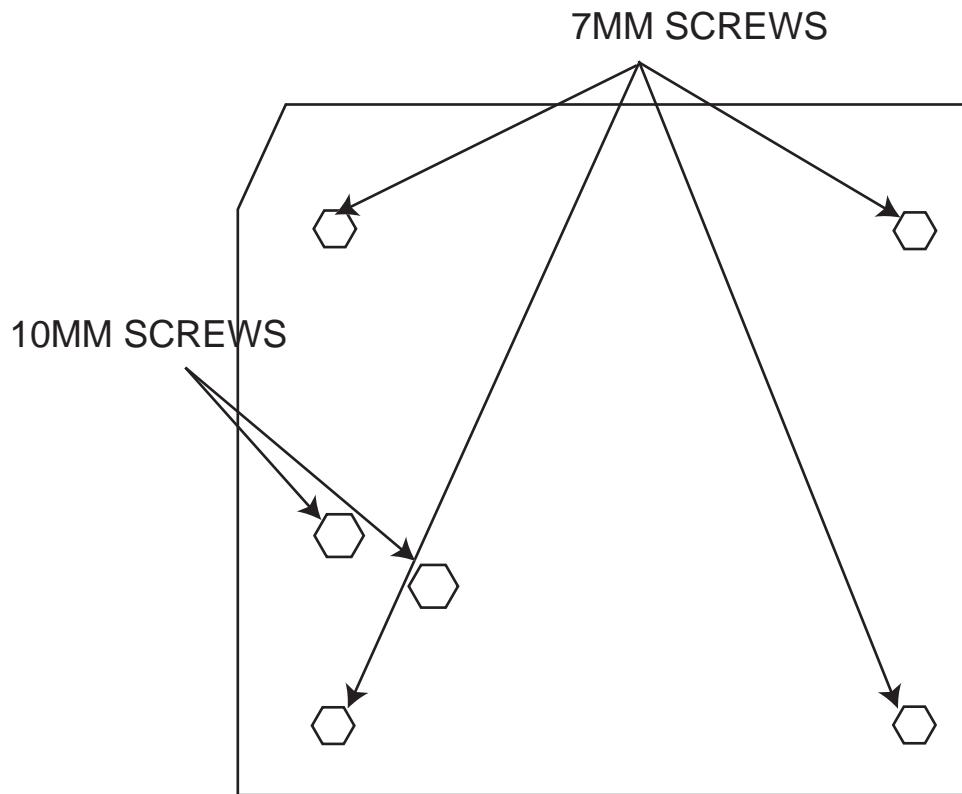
MAIN IGBT INVERTER BOARD LOCATION
